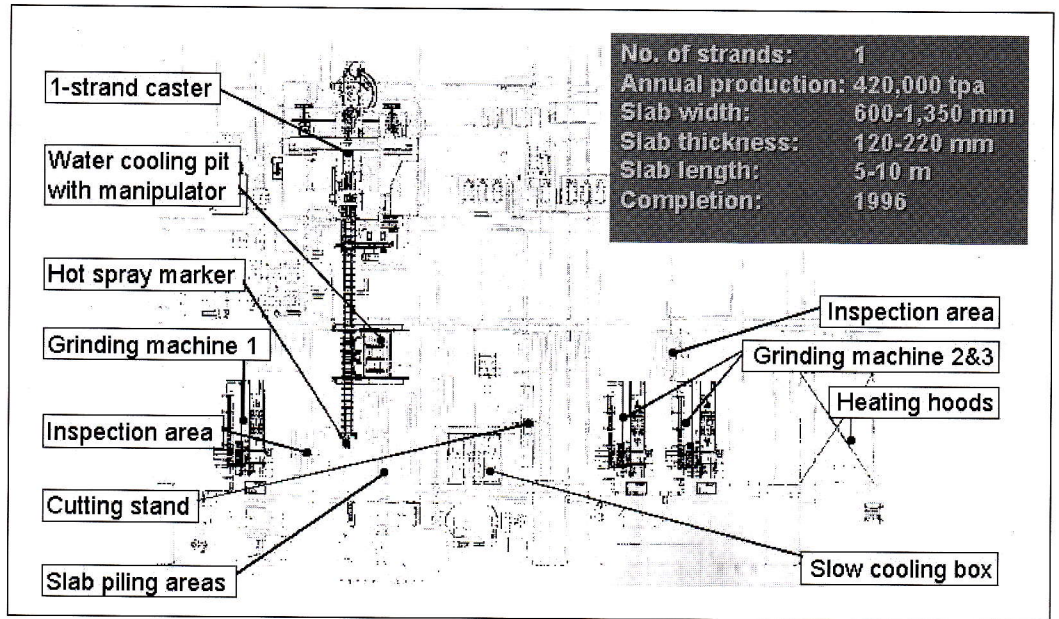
AK-Steel, Mansfield Medium Thick Slab Caster, Ohio, USA.
